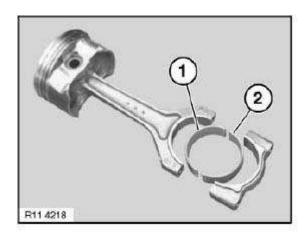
Identifying Bearing Shells Courtesy of BMW OF NORTH AMERICA, INC.
